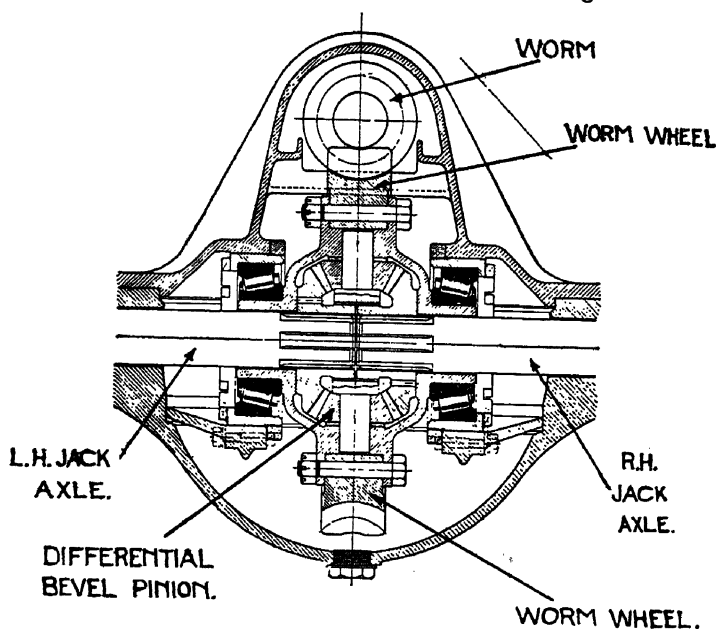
Overhead Worm and Wheel Final Drive and Differential Gear.
